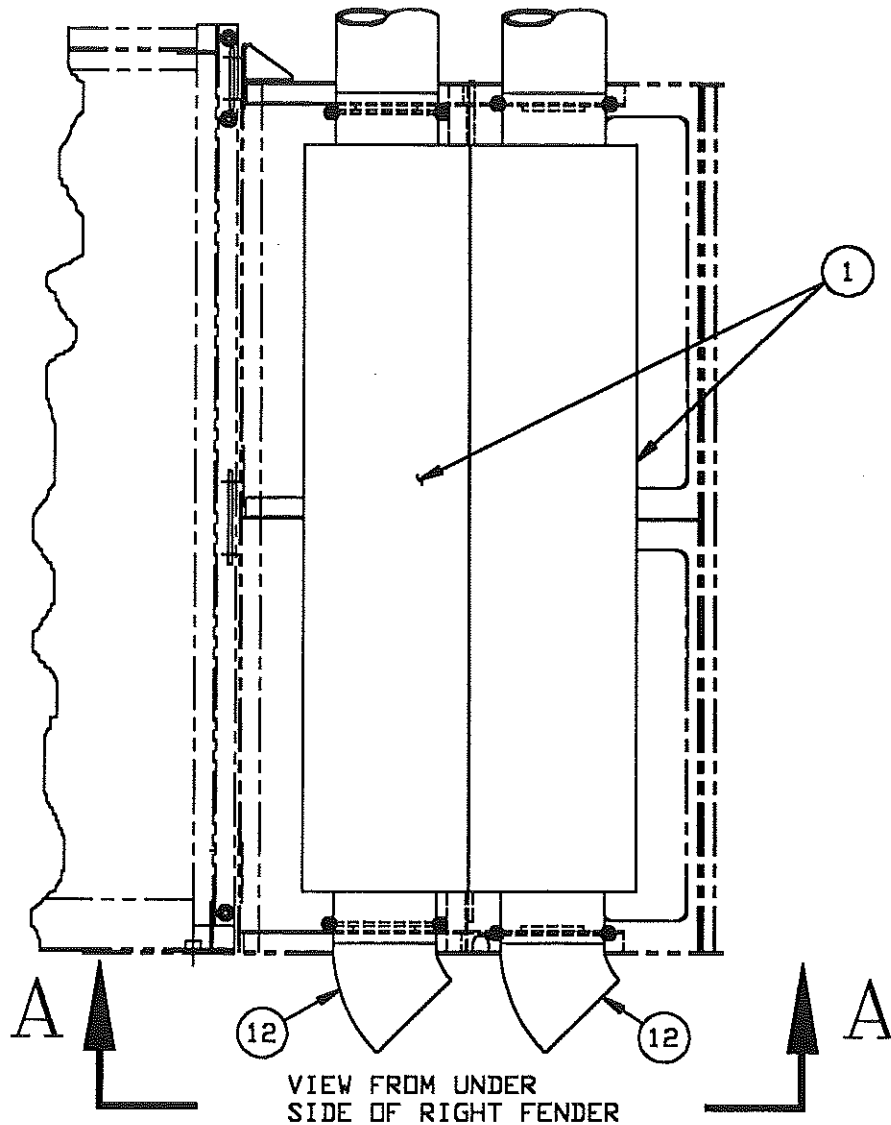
MUFFLER EXHAUST ASSEMBLY
